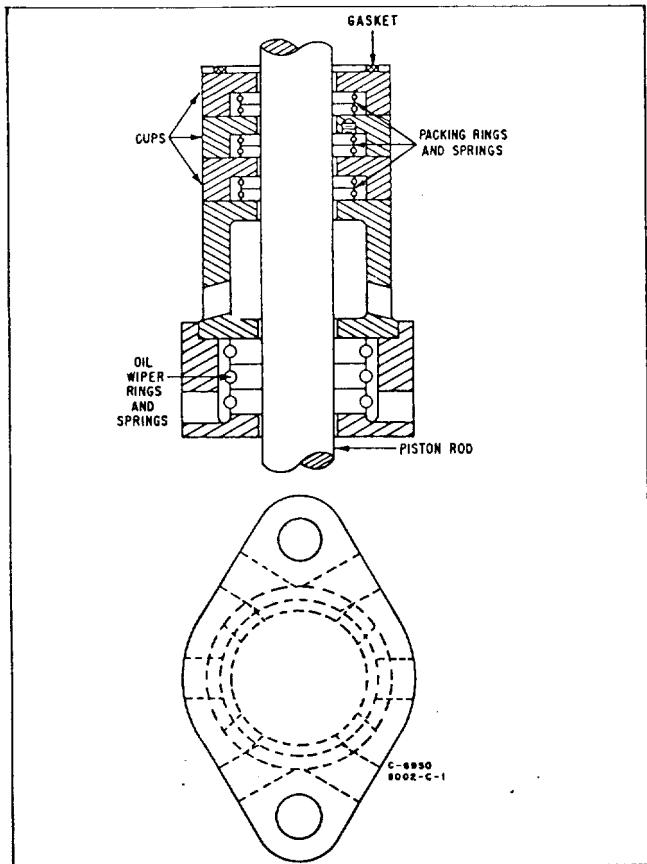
Piston Rod Packing and Oil Scraper Rings
